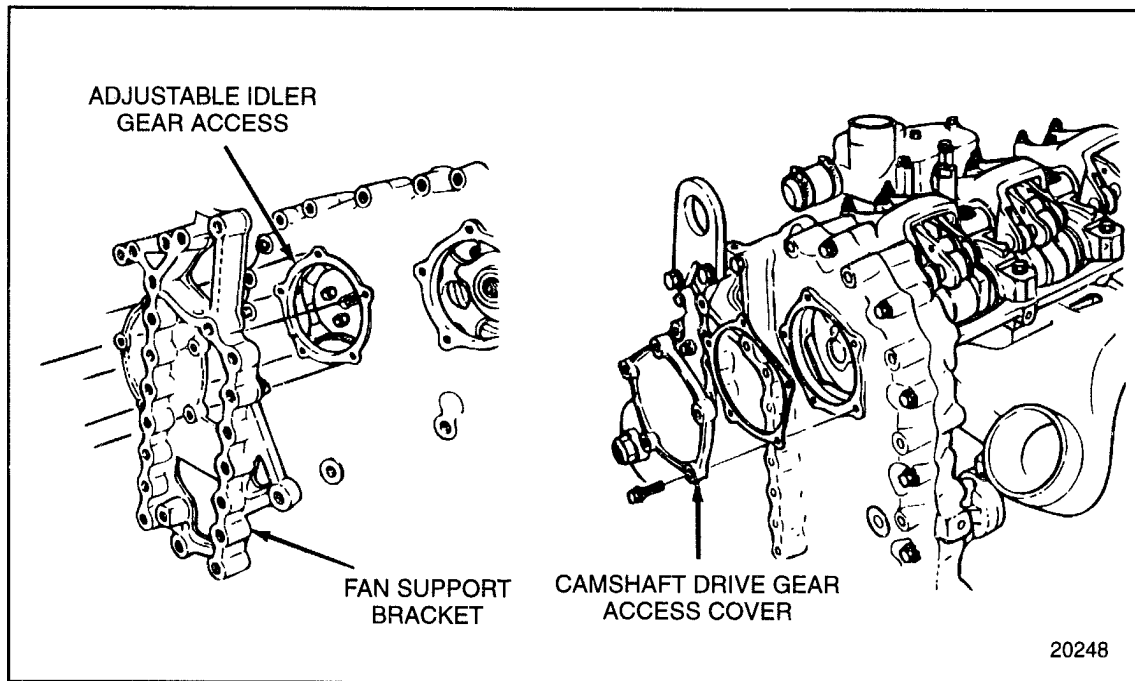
Camshaft Drive Gear and Adjustable Idler Gear Access Cover
